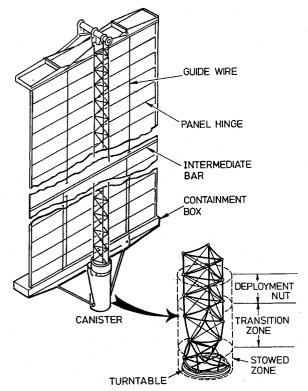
Flat-fold solar array, deployed by coilable mast.
